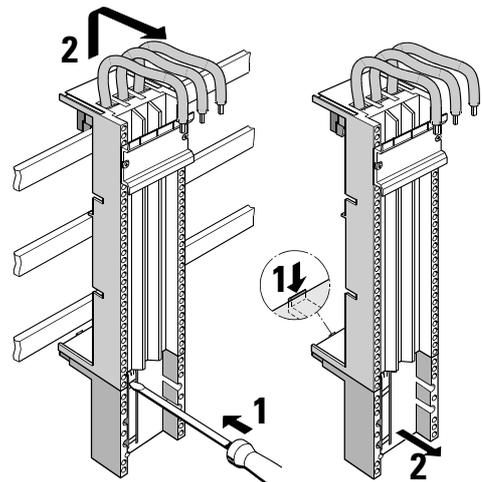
Busbar system, mounting/removal (frame sizes S00 to S2)
